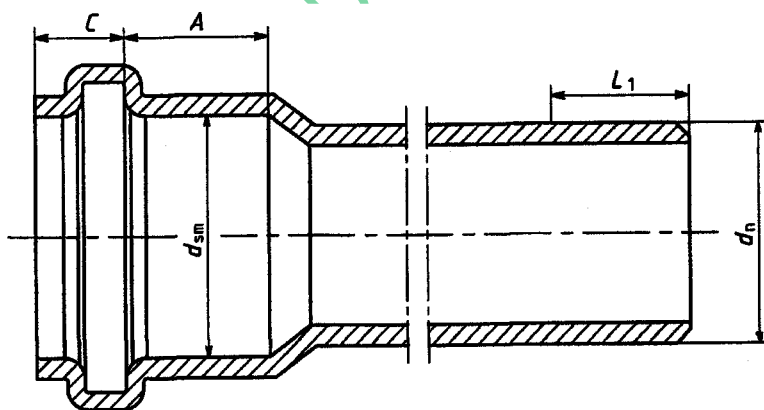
Location of points of measurement for ring seal sockets and spigots
